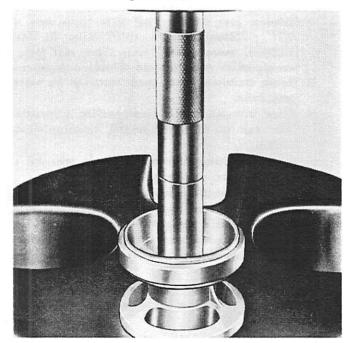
Installing Roller Bearings in Carrier Page 92 Master Service Manual
